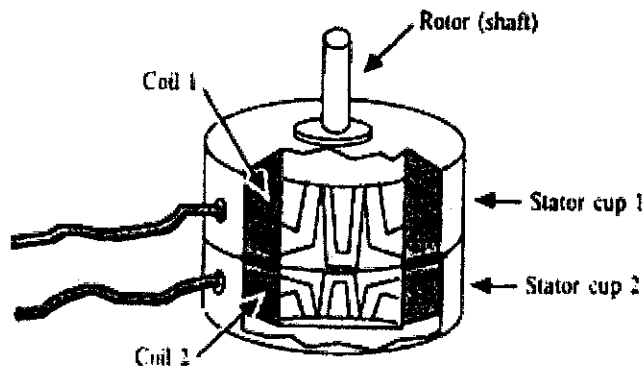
Illustration of a Stepper motor and components that make up a stepper motor.
